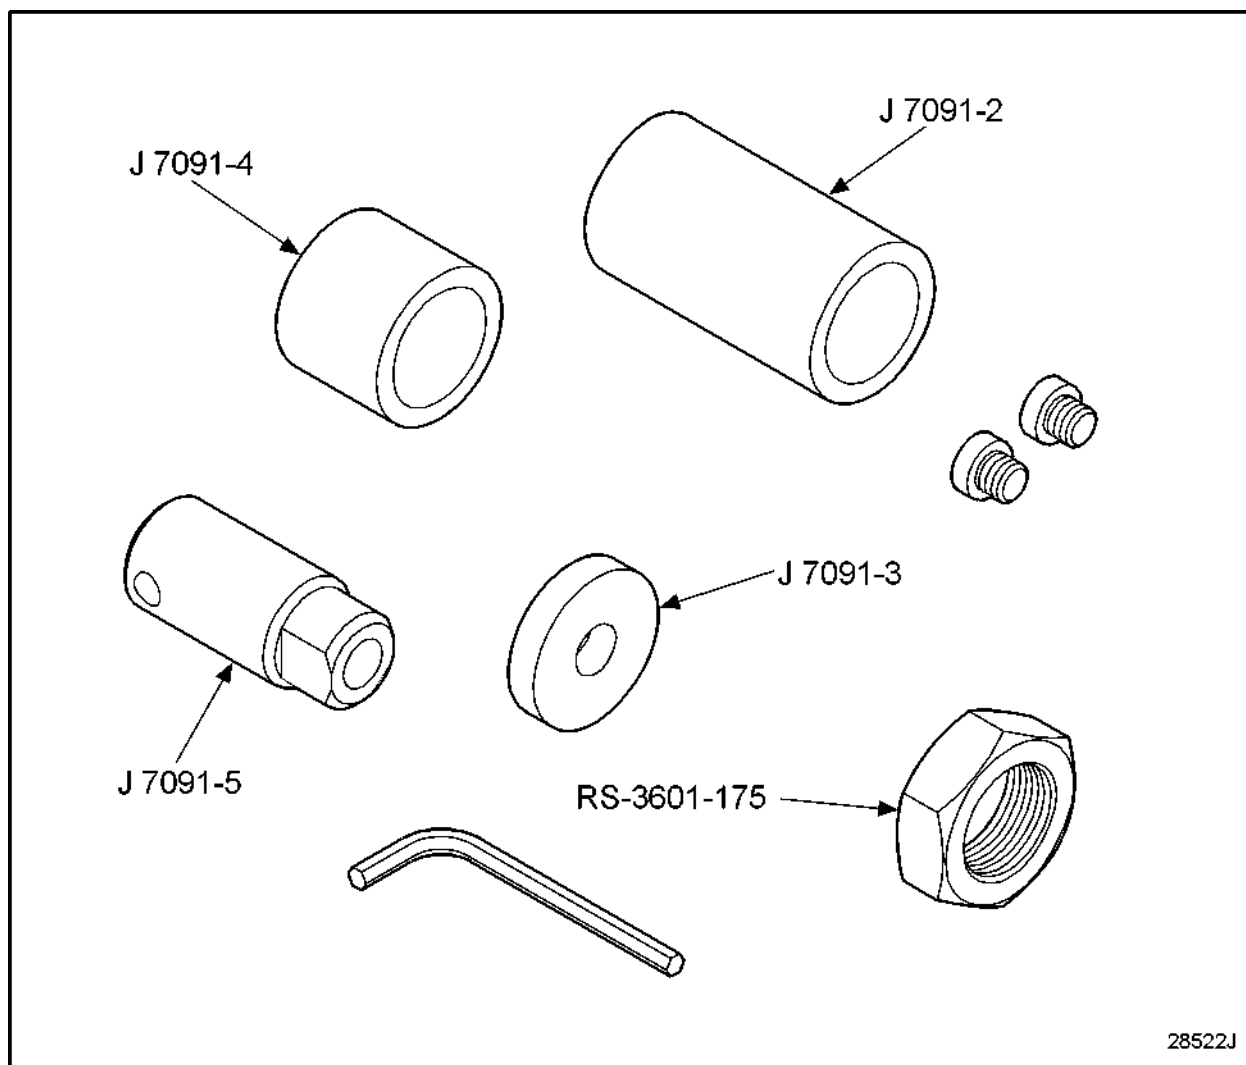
Valve Bridge Guide Remover (Press),J 7091-01
